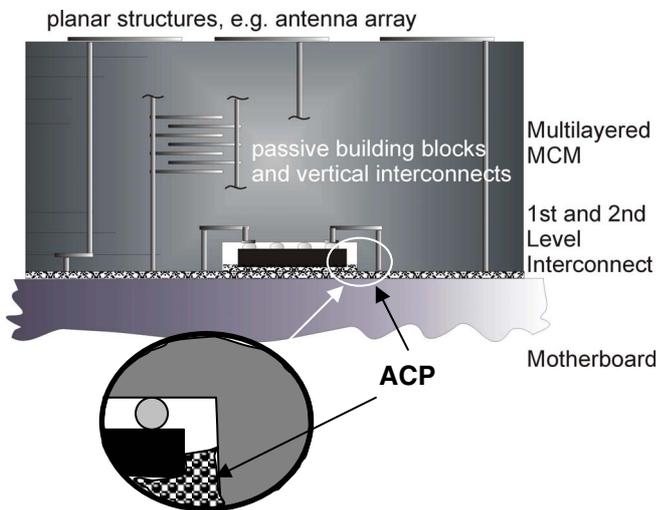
Millimeter-wave cavity-up ACP package and detailed view of MMIC in cavity.
